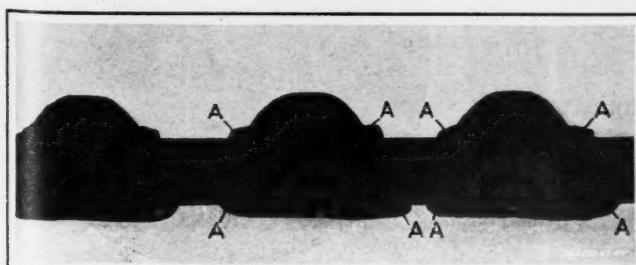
Boiler Plate riveted together, showing Space between Rivets and Plate, and how Rivet is made Oil-tight by welding Head to Plate
